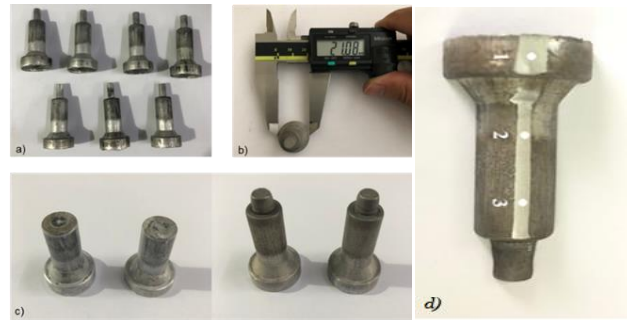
Products after forward extrusion (a), dimension of the product (b), and defective product after deformation (c)
